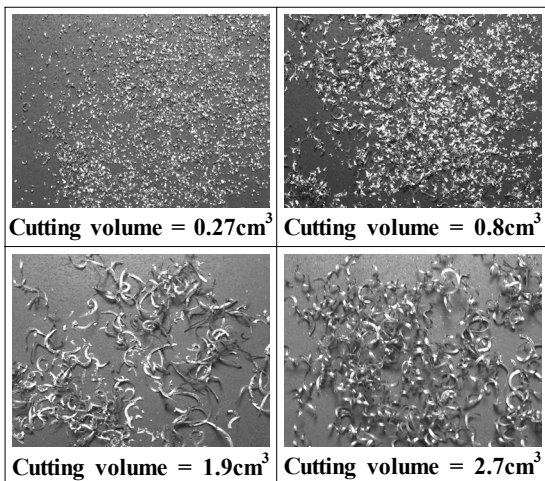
Chip (feed rate = 0.209mm/rev, cutting depth = 0.1mm, cutting speed= 100m/min)
